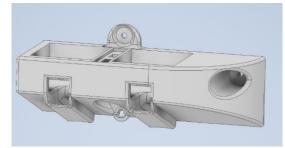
Joystick Module Housing 3D CAD Model (3D-Printed)
